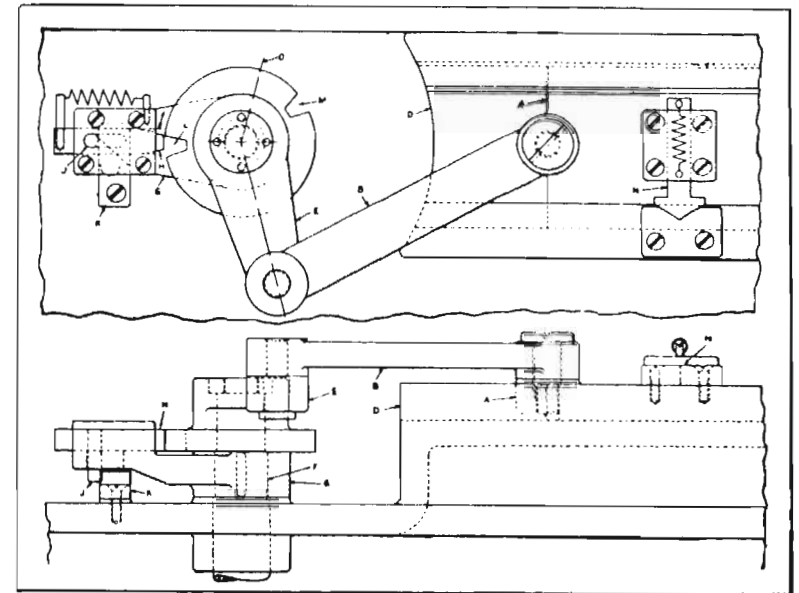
Reciprocating Slide Mechanism with Dwell at Center of Stroke
